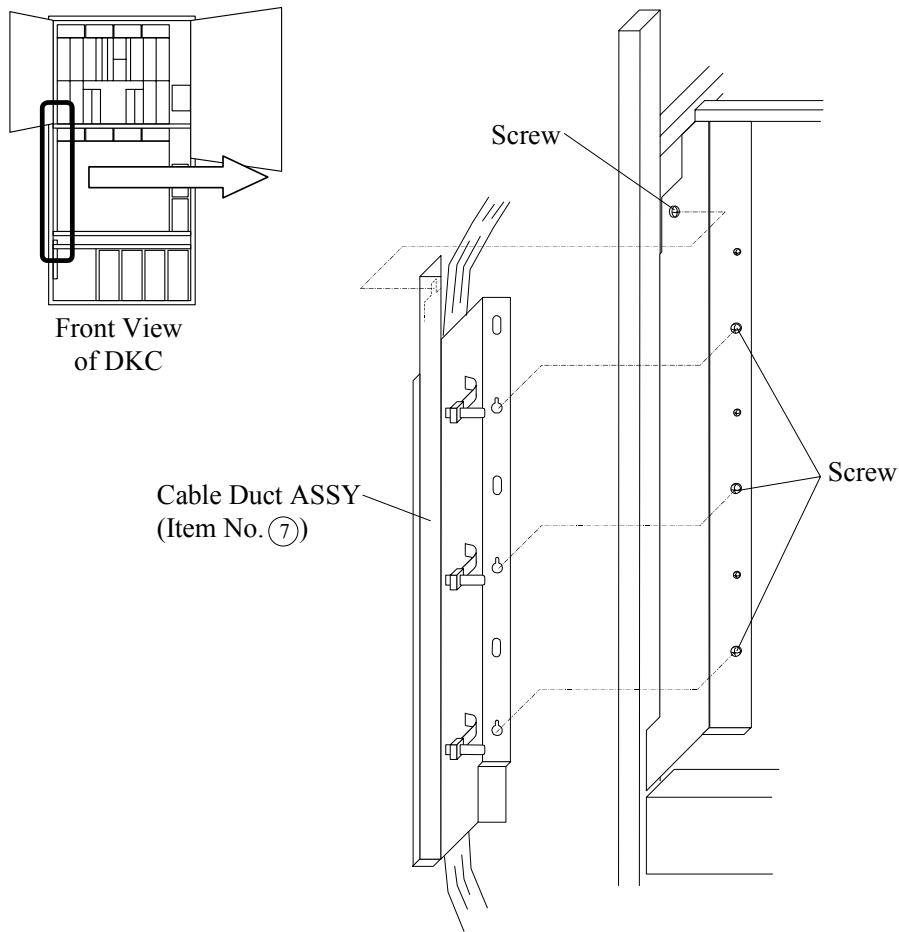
Attachment of Cable Duct ASSY (Item No. ⑦ in Parts List)
